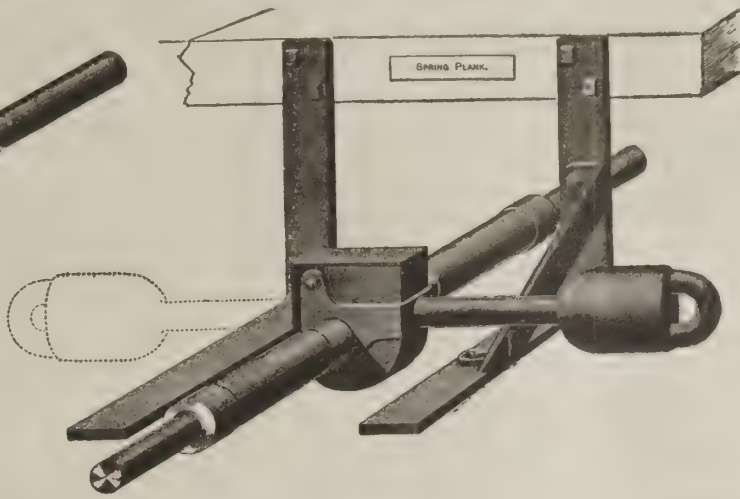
View of Adjuster Attached to Lower Brake Rods at Truck.
